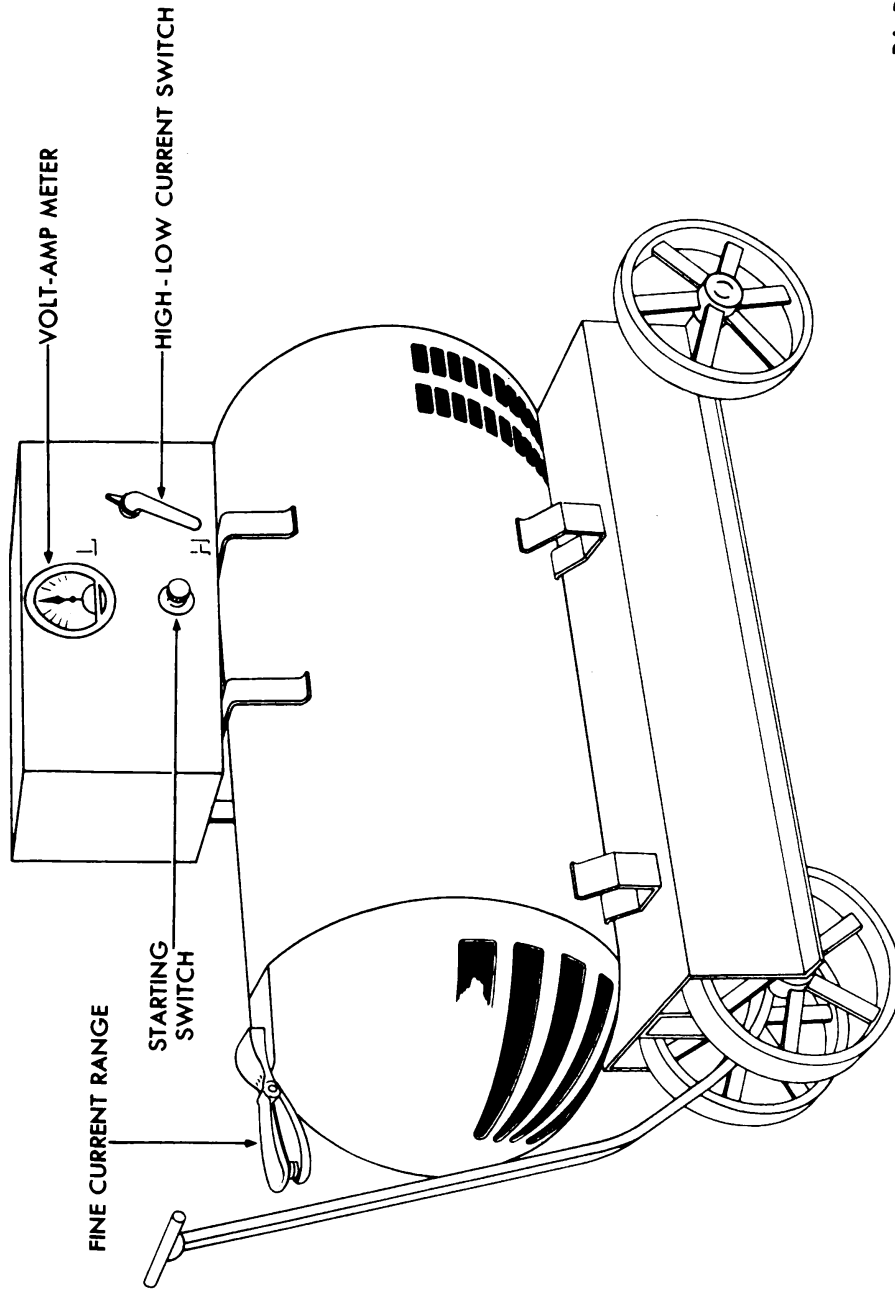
Alternating-current, Motor Generator Arc-Welding Machine
